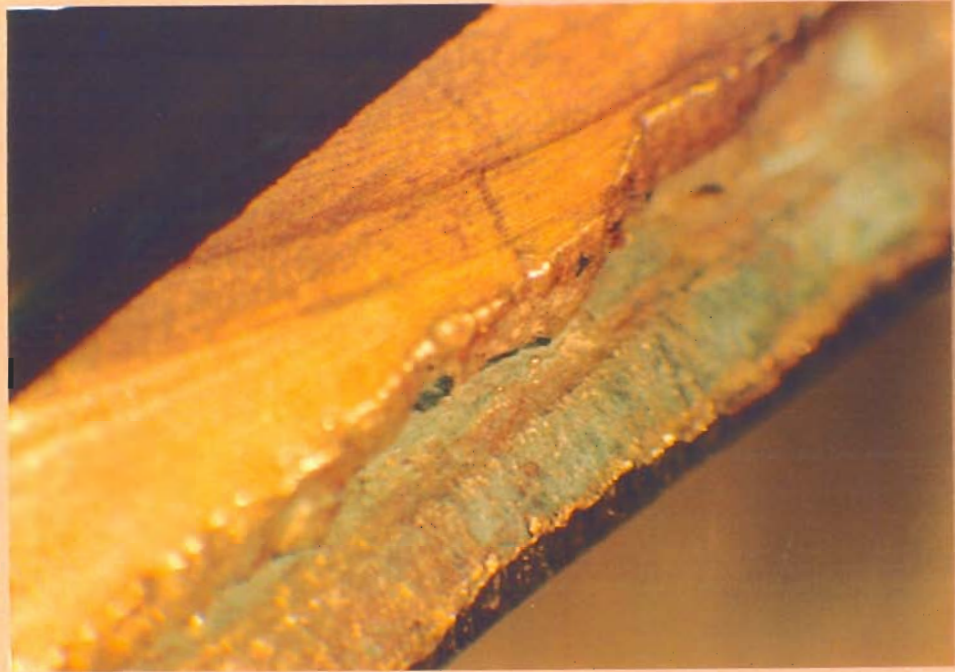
Another View of Incomplete Fusion in Circumferential Weld
